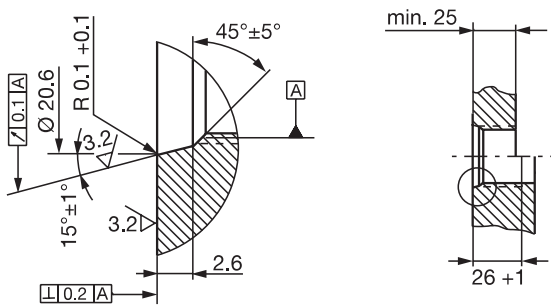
Mounting hole 3/4"-16UNF per SAE J475 O-ring 15.3x2.4
